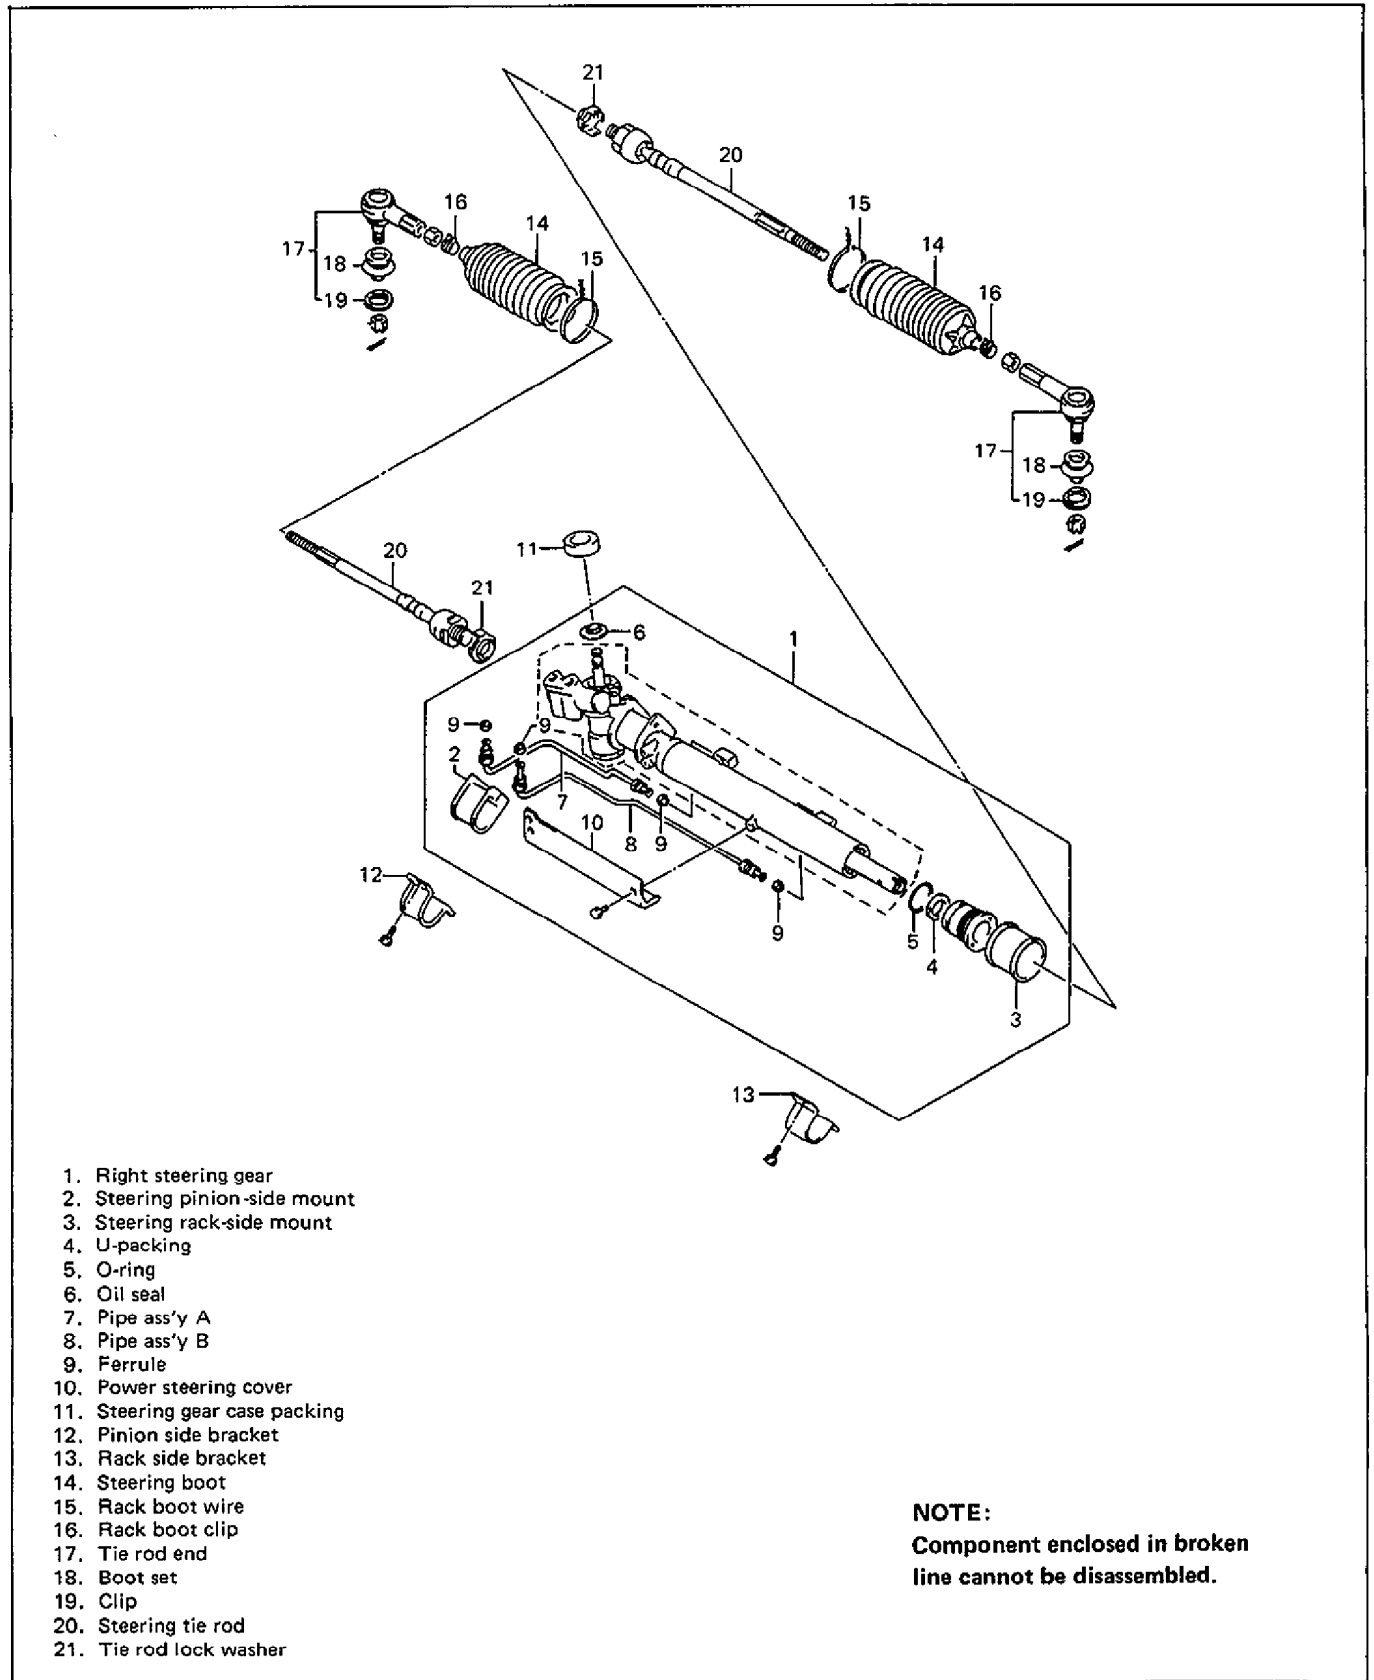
B1-49 Exploded View of Power Steering Gear Box
